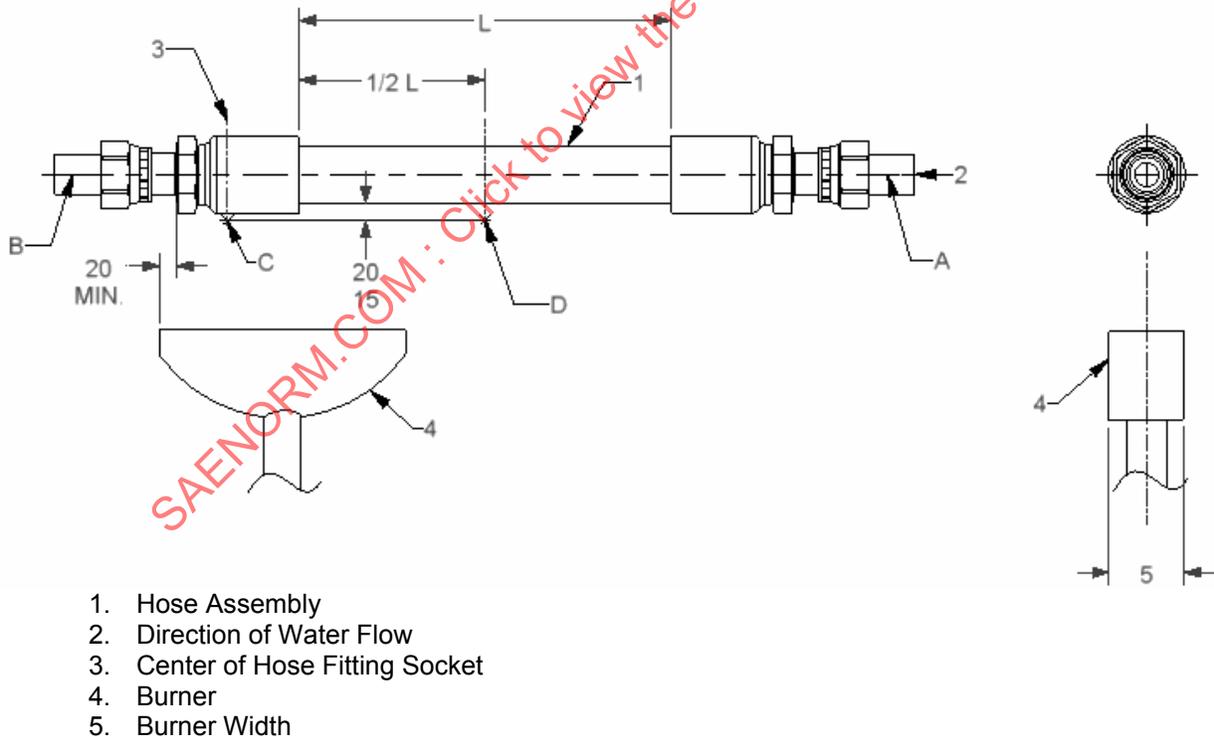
TEST SPECIMEN TO FLAME ARRANGEMENT
